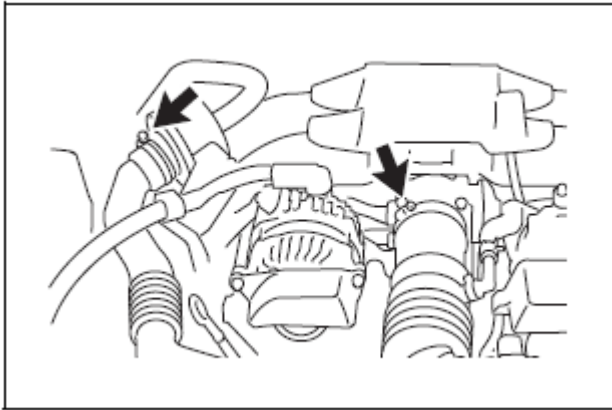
Identifying Air Cleaner Duct And Air Intake Boot Hose Clamps
